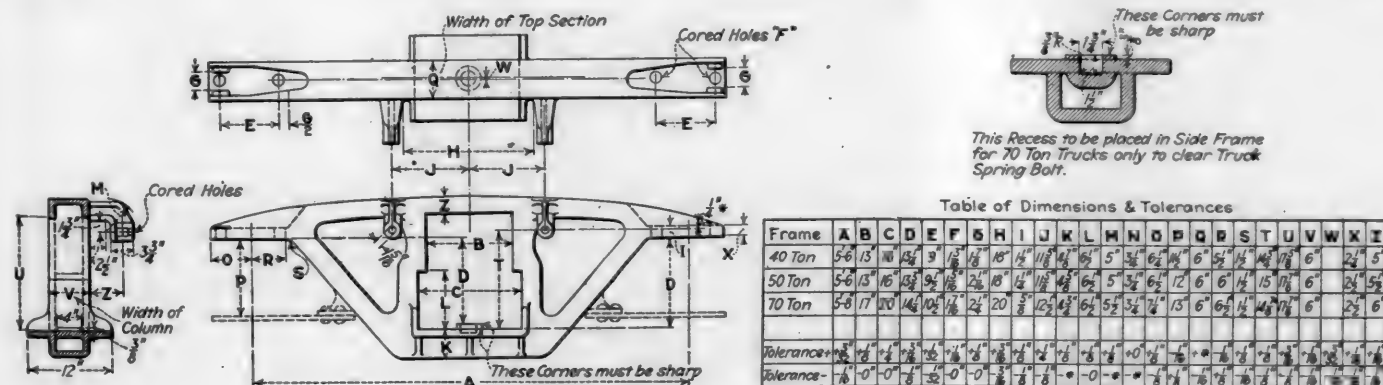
Limiting Dimensions for the Cast Steel Truck Side Frames
